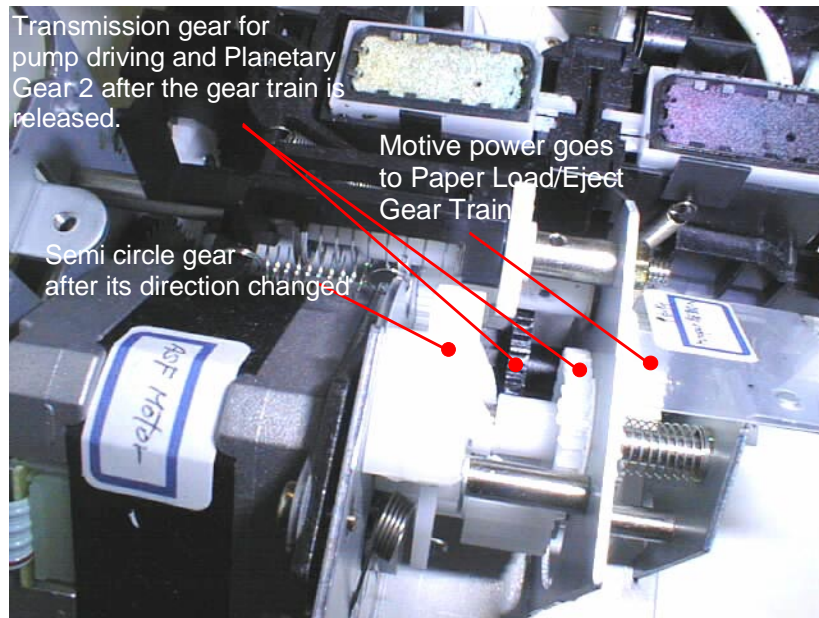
Gear Train Condition at transmitting power to the Paper Load/Eject Line
